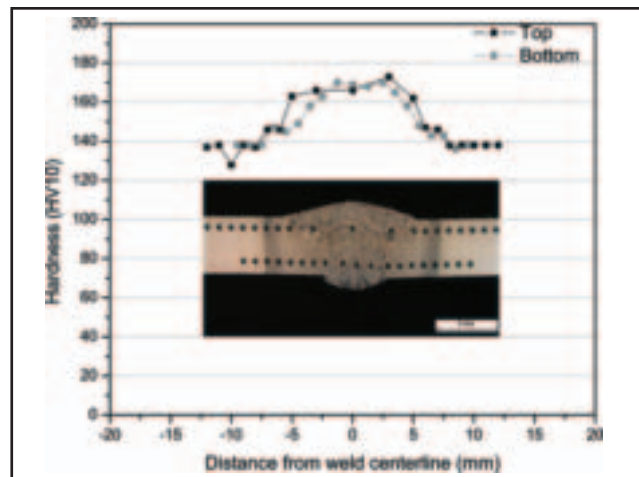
Hardness measurements taken along the top and bottom of the experimental weld plate.
